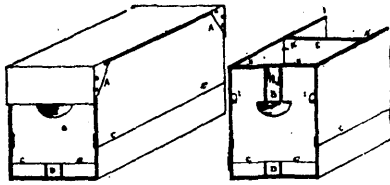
PERSPECTIVE VIEW FIG. 2. END SECTION
